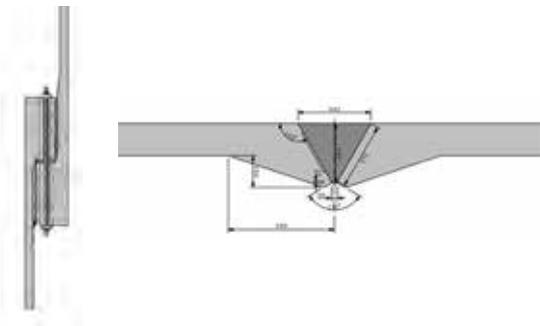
Joints between panels (vertical joint) and sections (horizontal joint)
